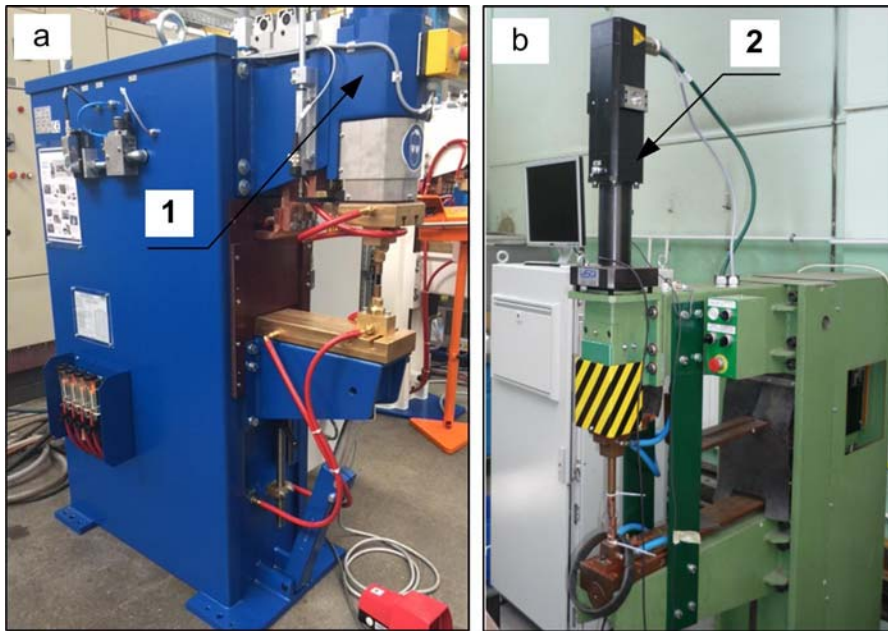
Test station for technological welding tests performed using: a) pneumatic and b) electromechanical electrode force; (1) pneumatic actuator, (2) servo-motor.
